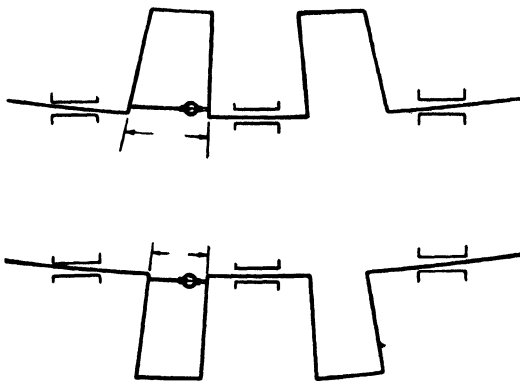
Exaggerated position of a shaft caused by a low bearing.
